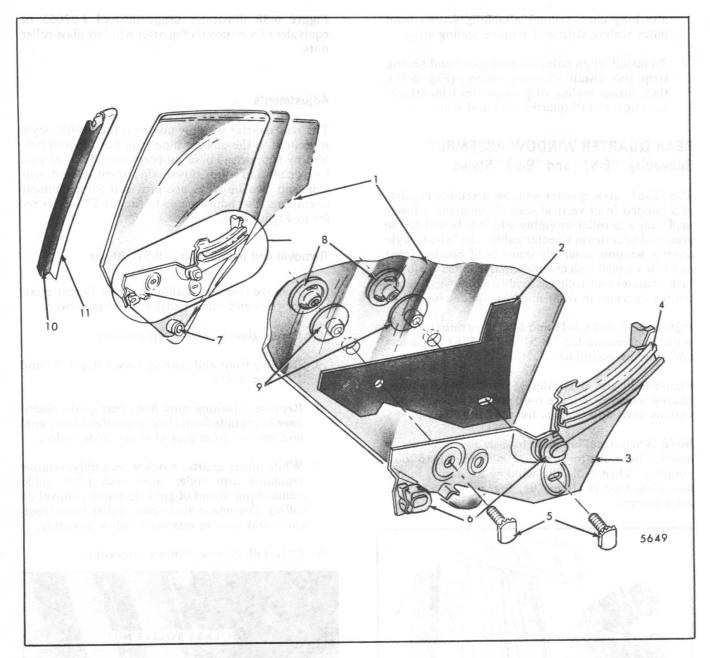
Rear Quarter Window Assembly - "E-67" Styles
